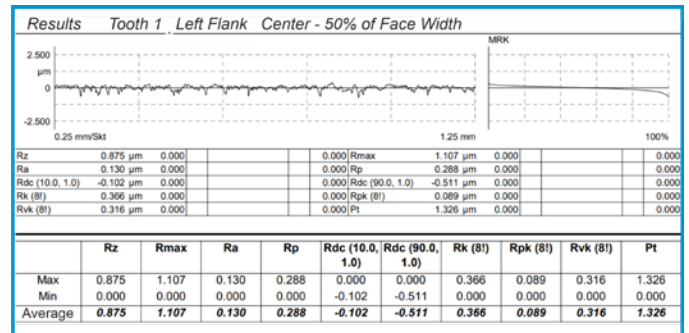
Surface roughness measurement of ring gear, module 2.4.
